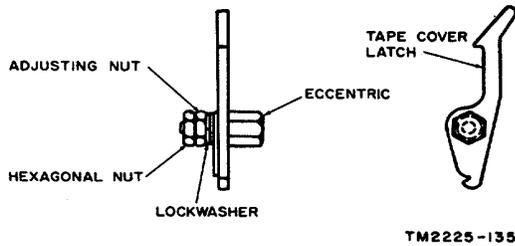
Tape cover latch eccentric adjustment (TT-76/GGC).
